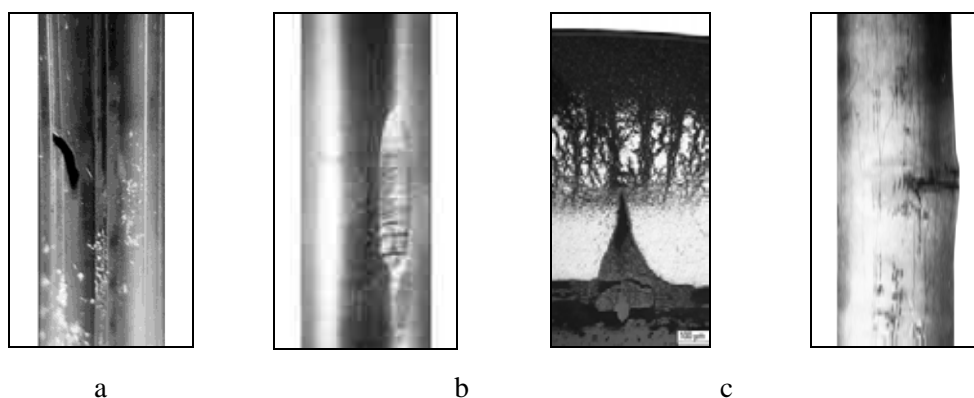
Defects of the irradiated WWER fuel rod claddings: (a) debris-defect; (b) fretting-wear; (c) internal hydrogenation; (d) superposition of the through crack and local change in diameter.
